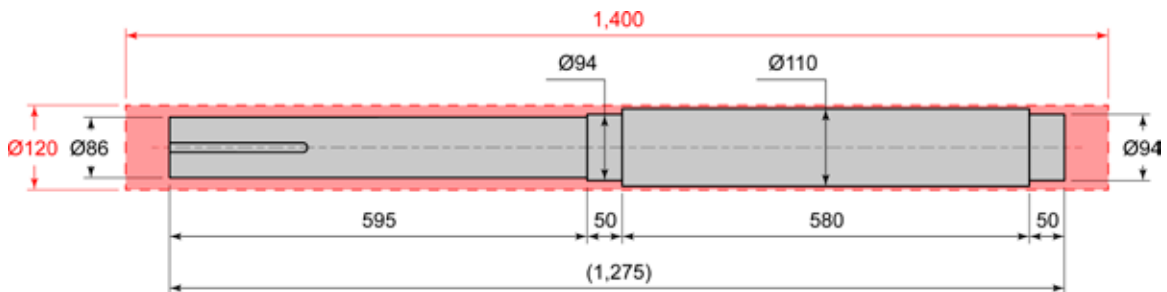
Example of a mechanical component to be manufactured from Q&T steel.
